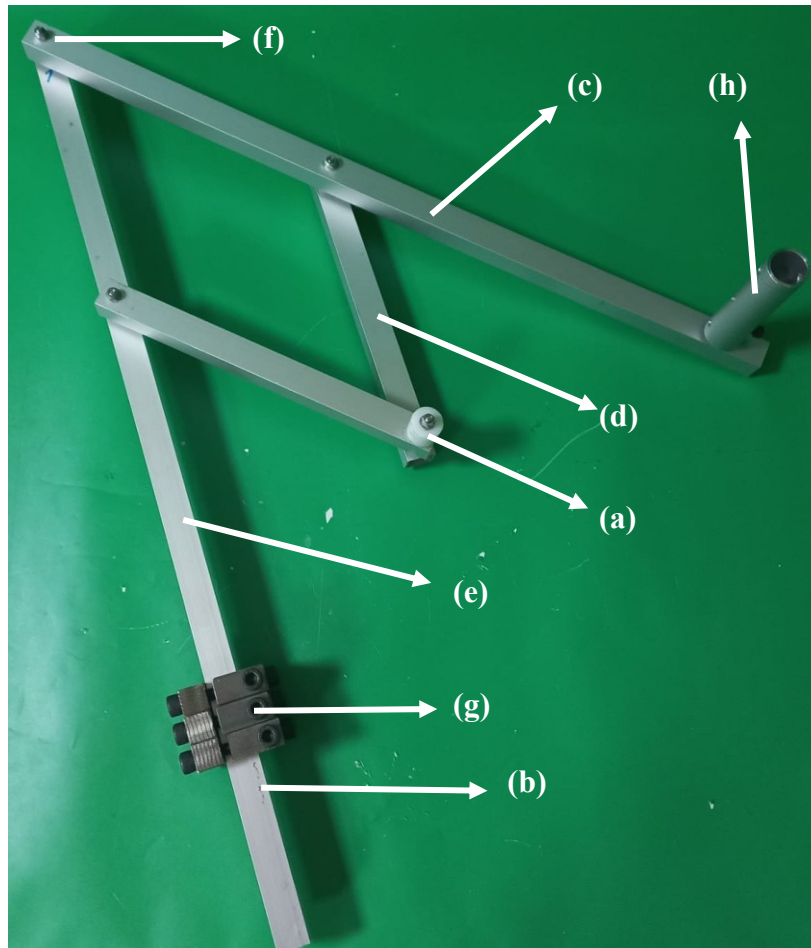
Completed assembly of one side of pantograph and all parts of it
